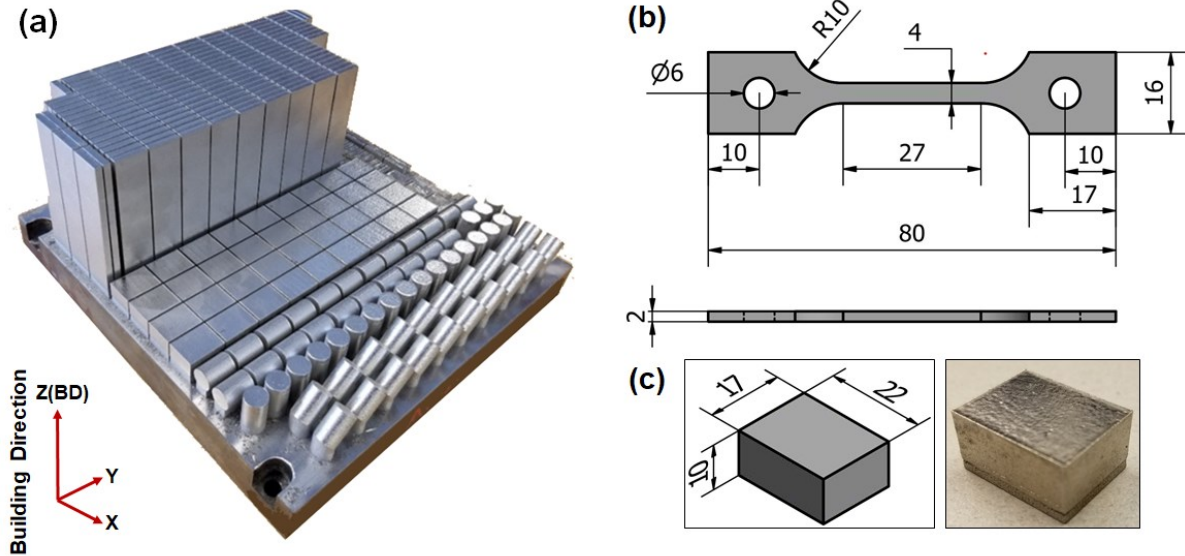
Building platform illustrating the building orientation of the prismatic coupons; (b) geometry of the tensile samples; (c) geometry of the cuboid samples (dimensions in mm).
